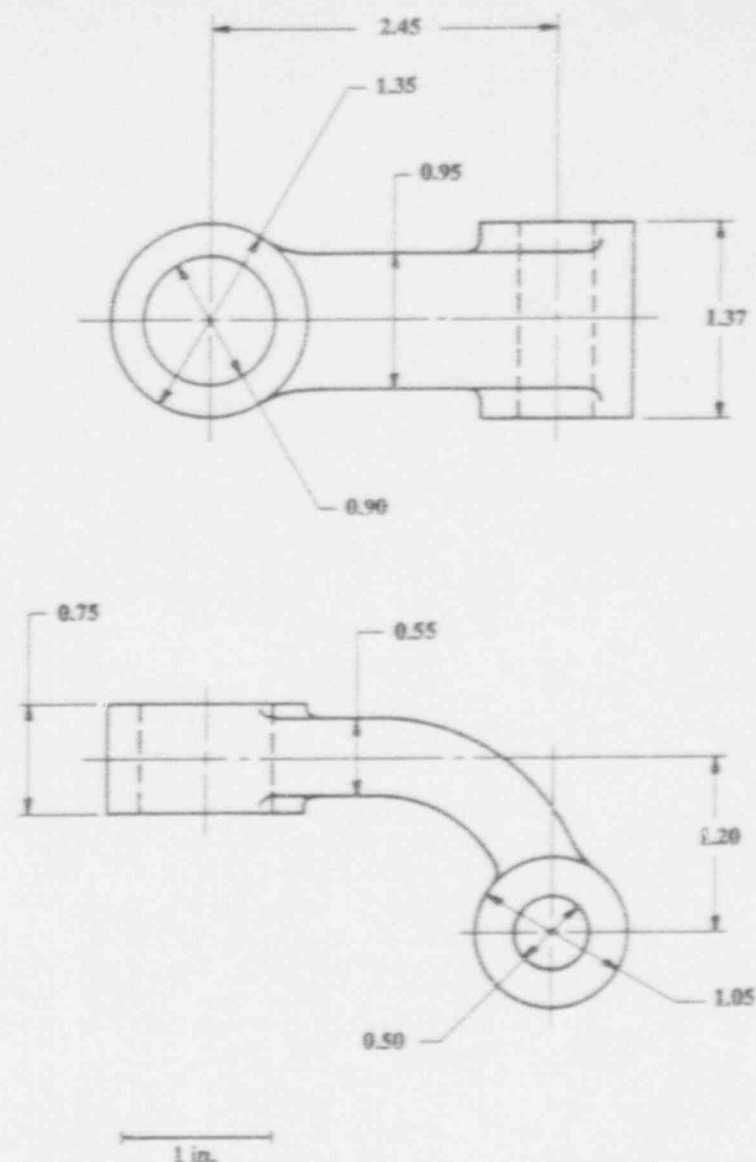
SAMPLE NO. 746, 3-INCH CHECK VALVE. Dimensions in inches. Diagram is schematic.
